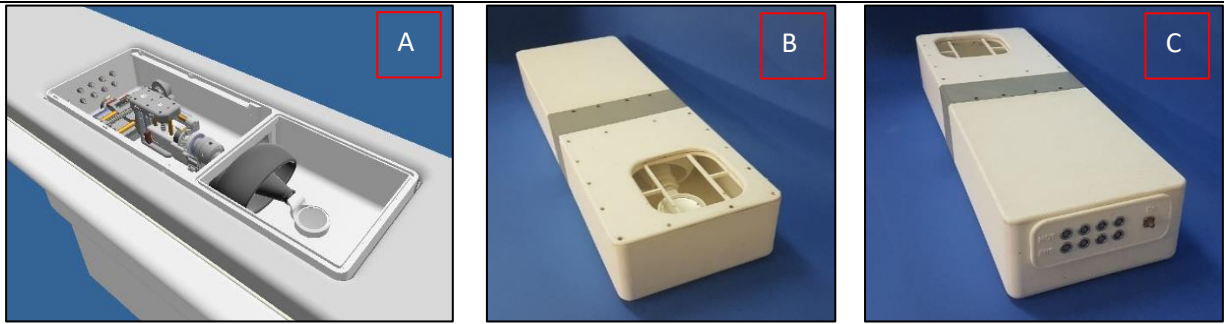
(A) CAD drawing of the 4 DOF robotic device version 1, (B) Front view photo of the manufactured device, and (C) Rear view photo of the manufactured device.
